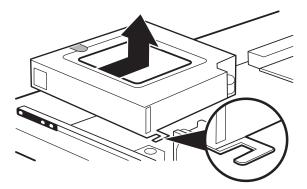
Removing the DVD Assembly From the Chassis
